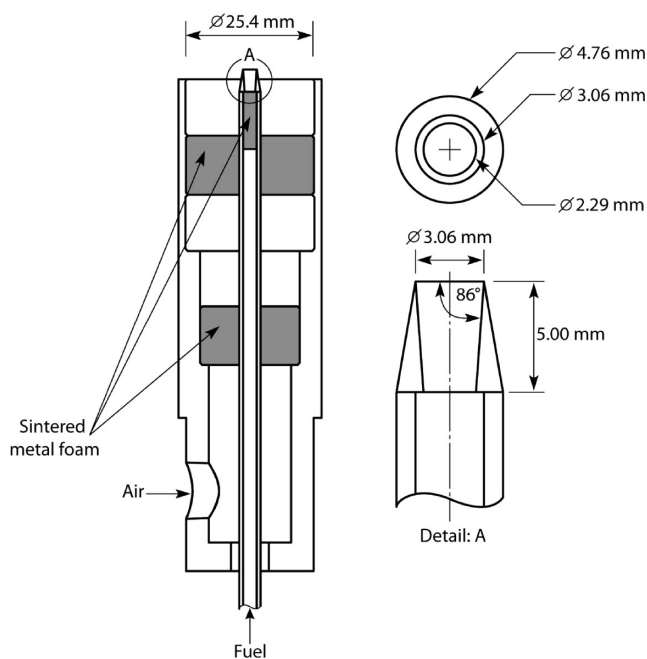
Details of the co-flow burner used in the high-pressure experiments.
